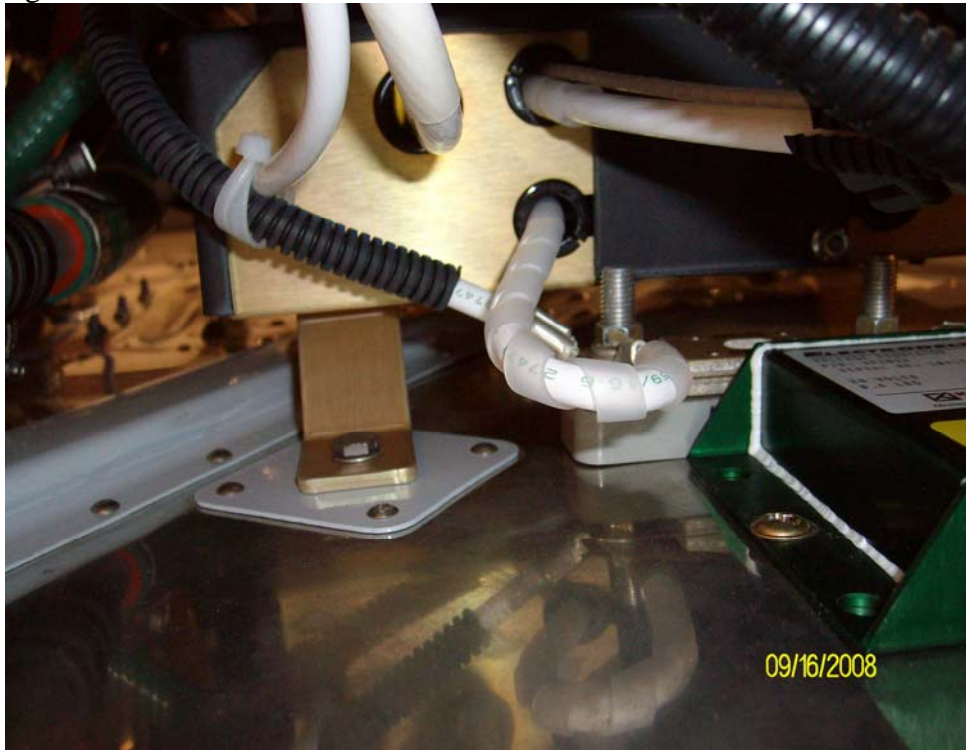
Bottom of Lamar box showing snap bushing and cover modification.
